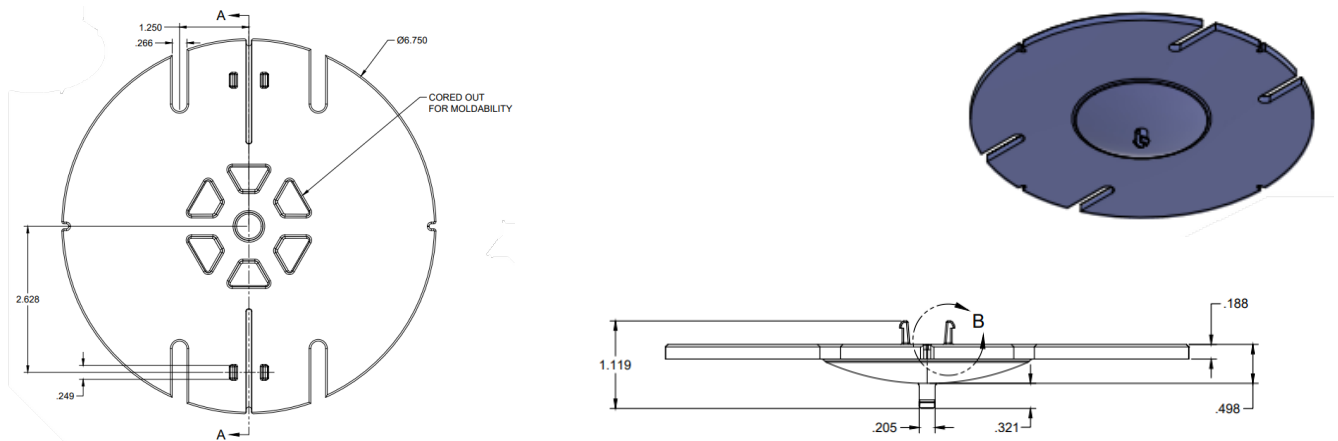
ALL-IN-1 EVERJACK ROTATING PLATE COMPONENT
